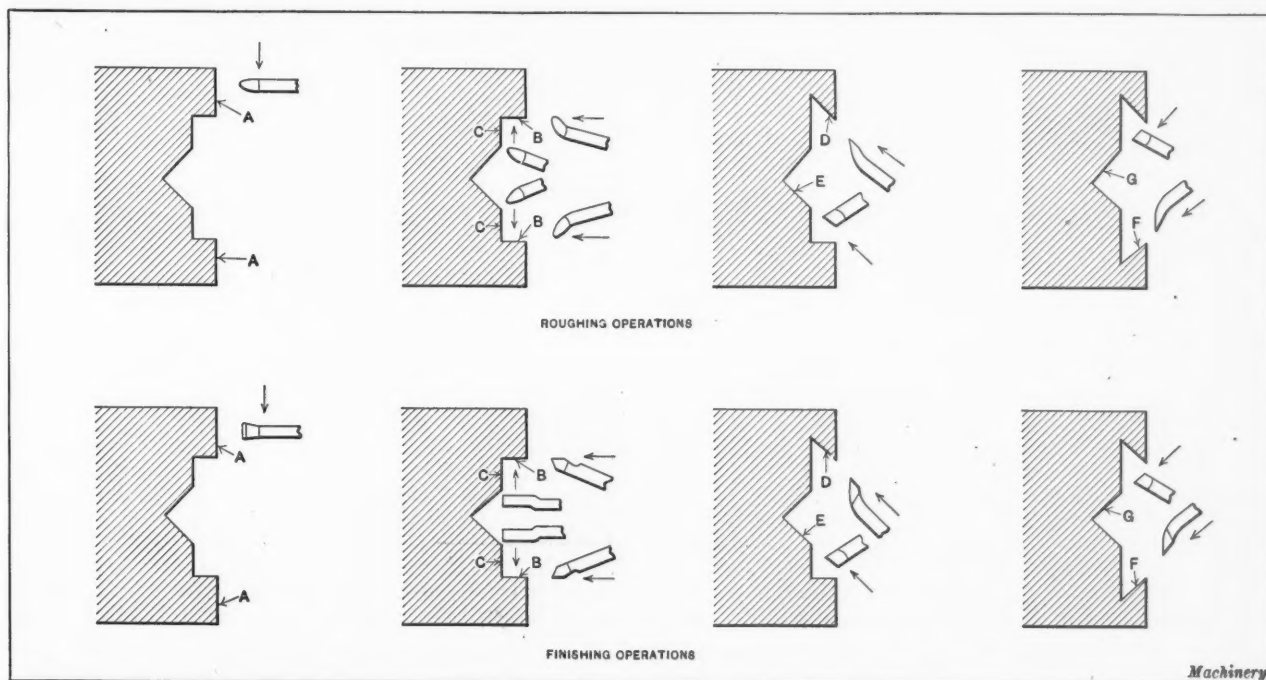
Diagram illustrating Successive Steps in performing the Planing Operation shown on the Machine in Fig. 5
